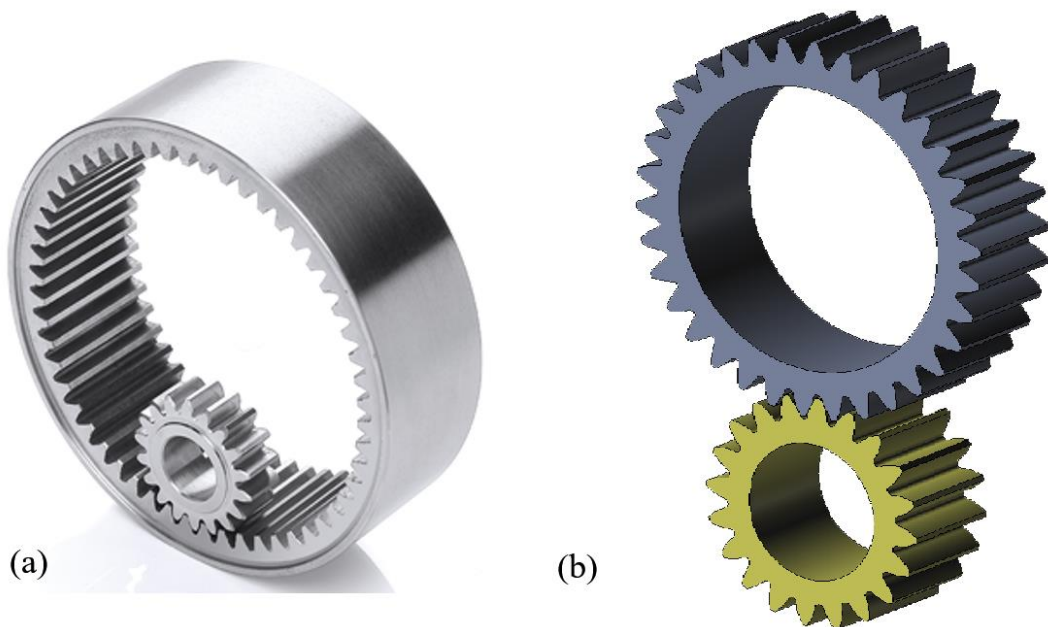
Spur gear: (a) Internal [4]; (b) External [5]
